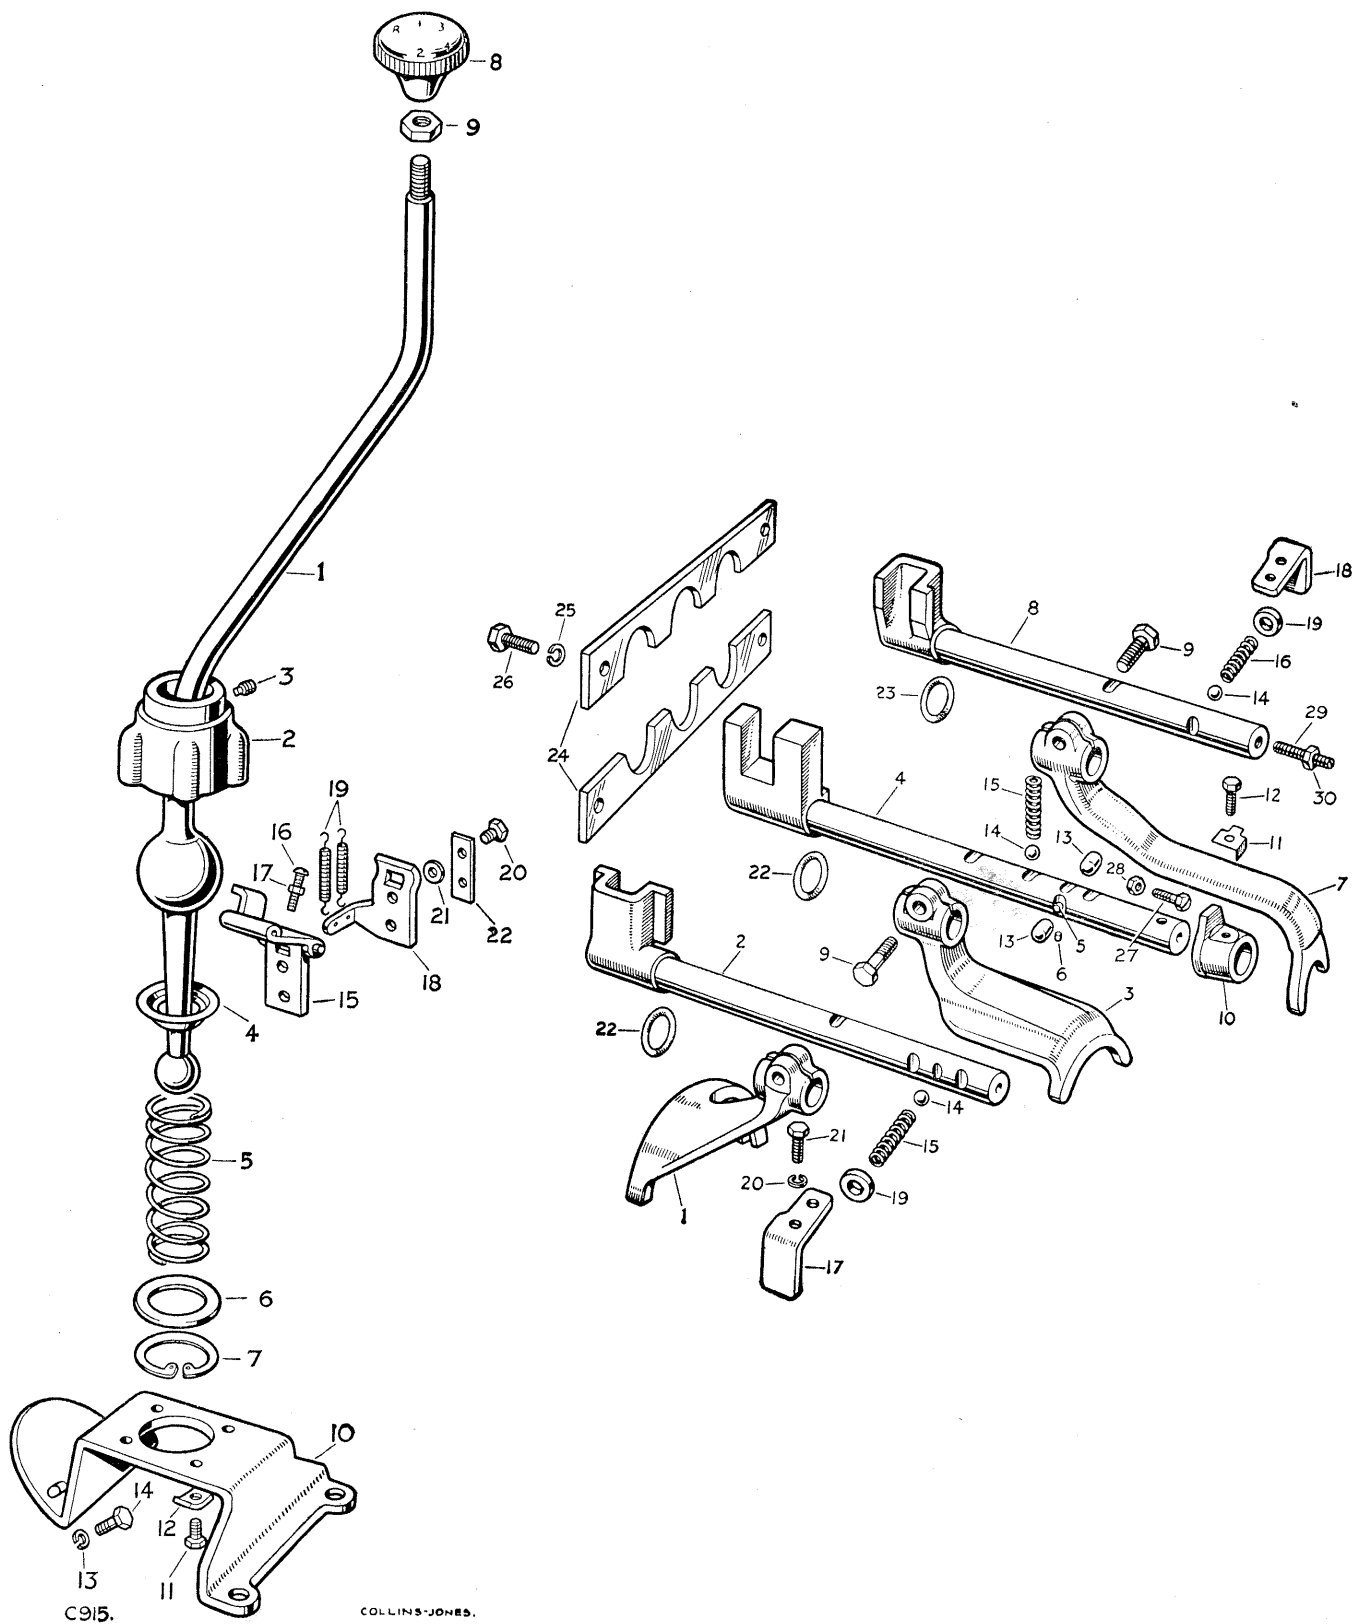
Layout of the gearbox unit: main gear change lever and selectors
